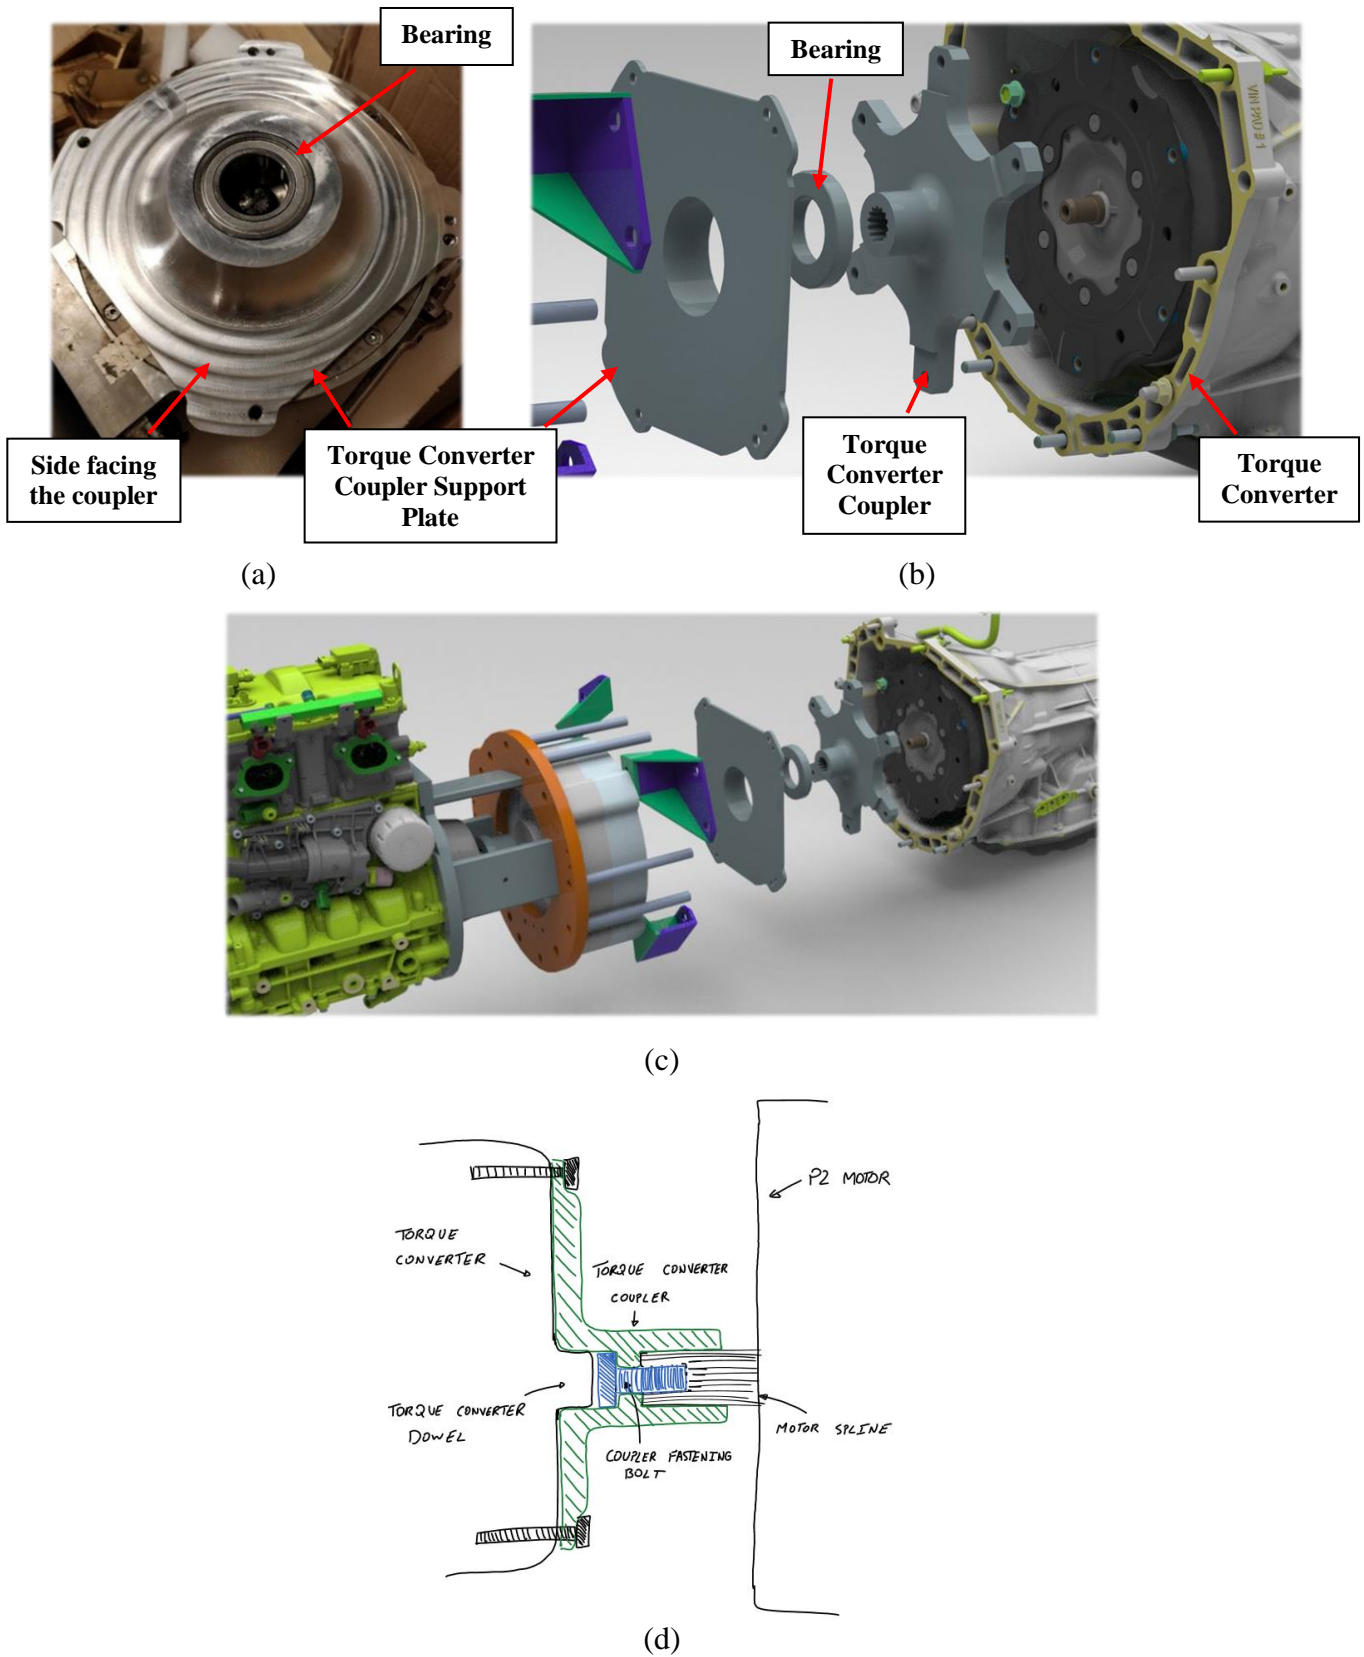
Torque Converter Coupler Support - (a) support plate, (b) exploded view, (c) exploded view zoomed out, (d) torque converter cross section sketch
